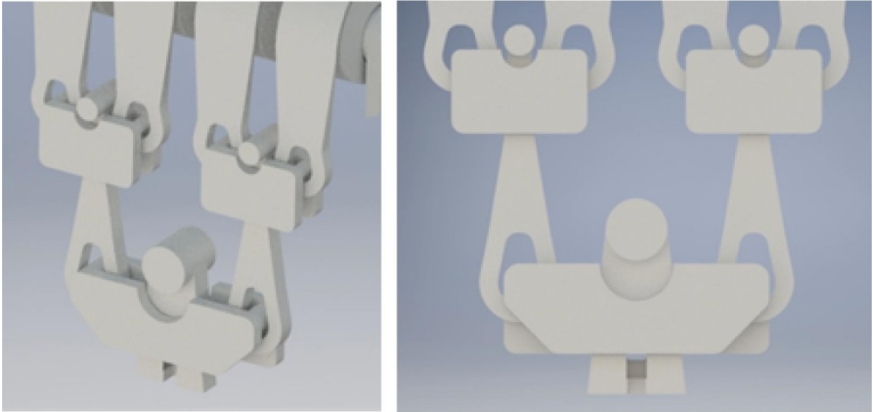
(left) isometric view of the whiplight mechanism. All connections are designed to be 3D printed with large play, (right) frontal view of the whiplight mechanism.
